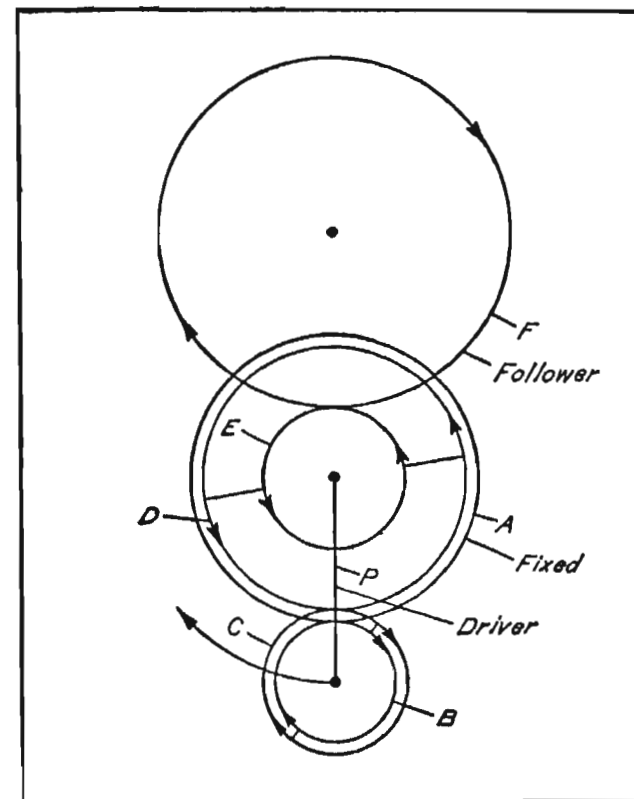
Diagrammatic Layout of Epicyclic Reduction Gearing Used in Mechanism Shown in Fig. 3.
